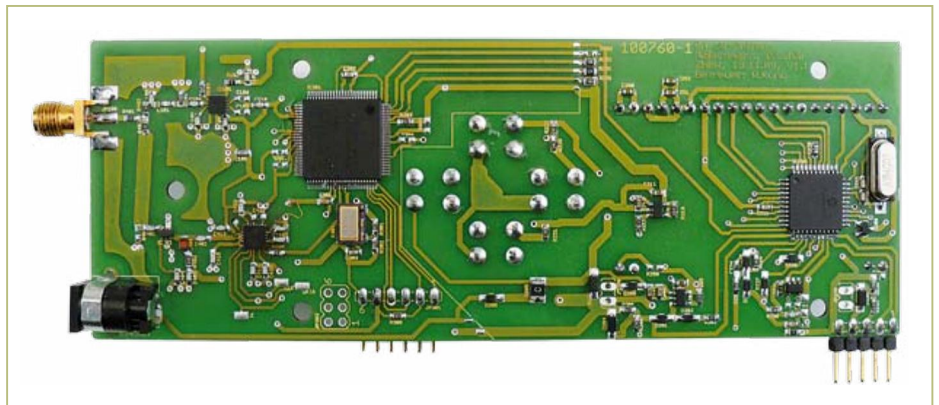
SMD side of the manually assembled Elektor lab prototype board.
